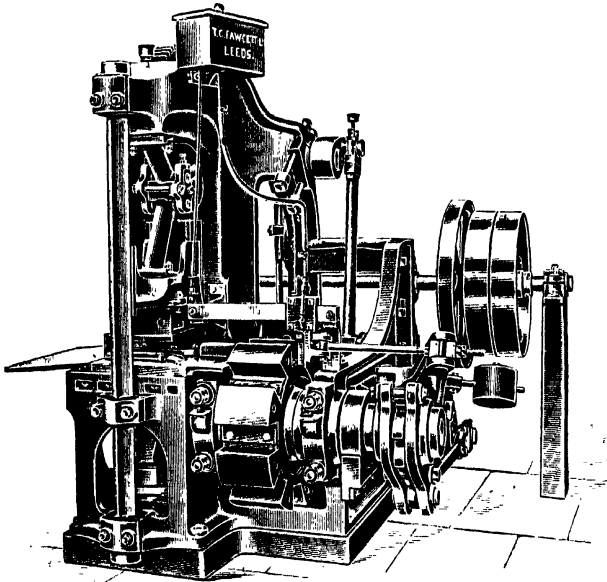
Stiff-plastic brick machine with open clot-moulds.
